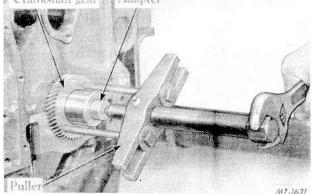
Removal of Crankshaft Gear Using Puller SE- 1368
